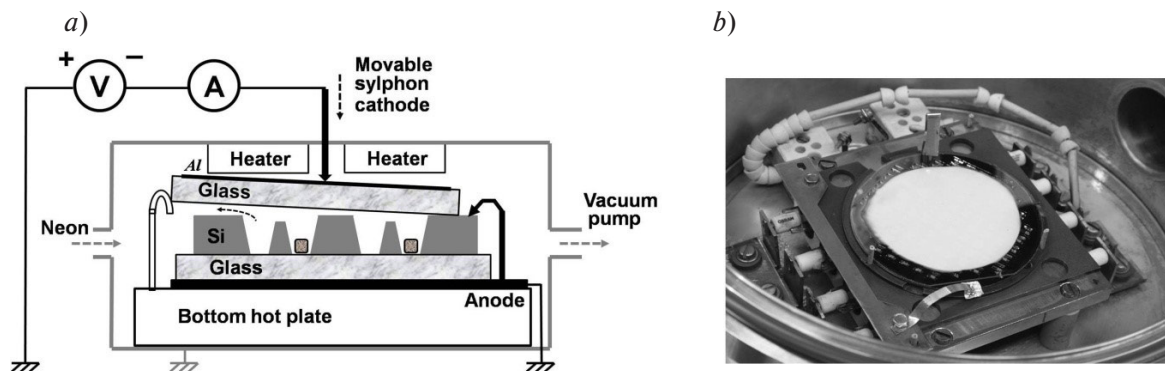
Gas cells sealing equipment scheme (a) and bonding tool view (b)
